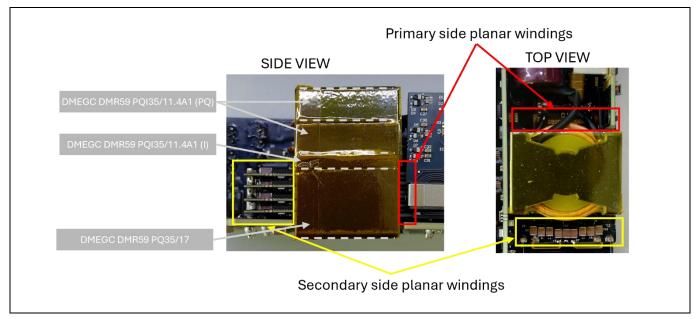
Integrated planar transformer assembly – picture of an assembled unit
